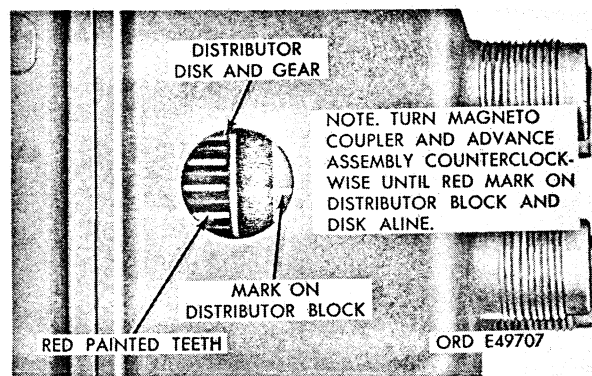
LOCATING NUMBER ONE CYLINDER FIRING POSITION.
